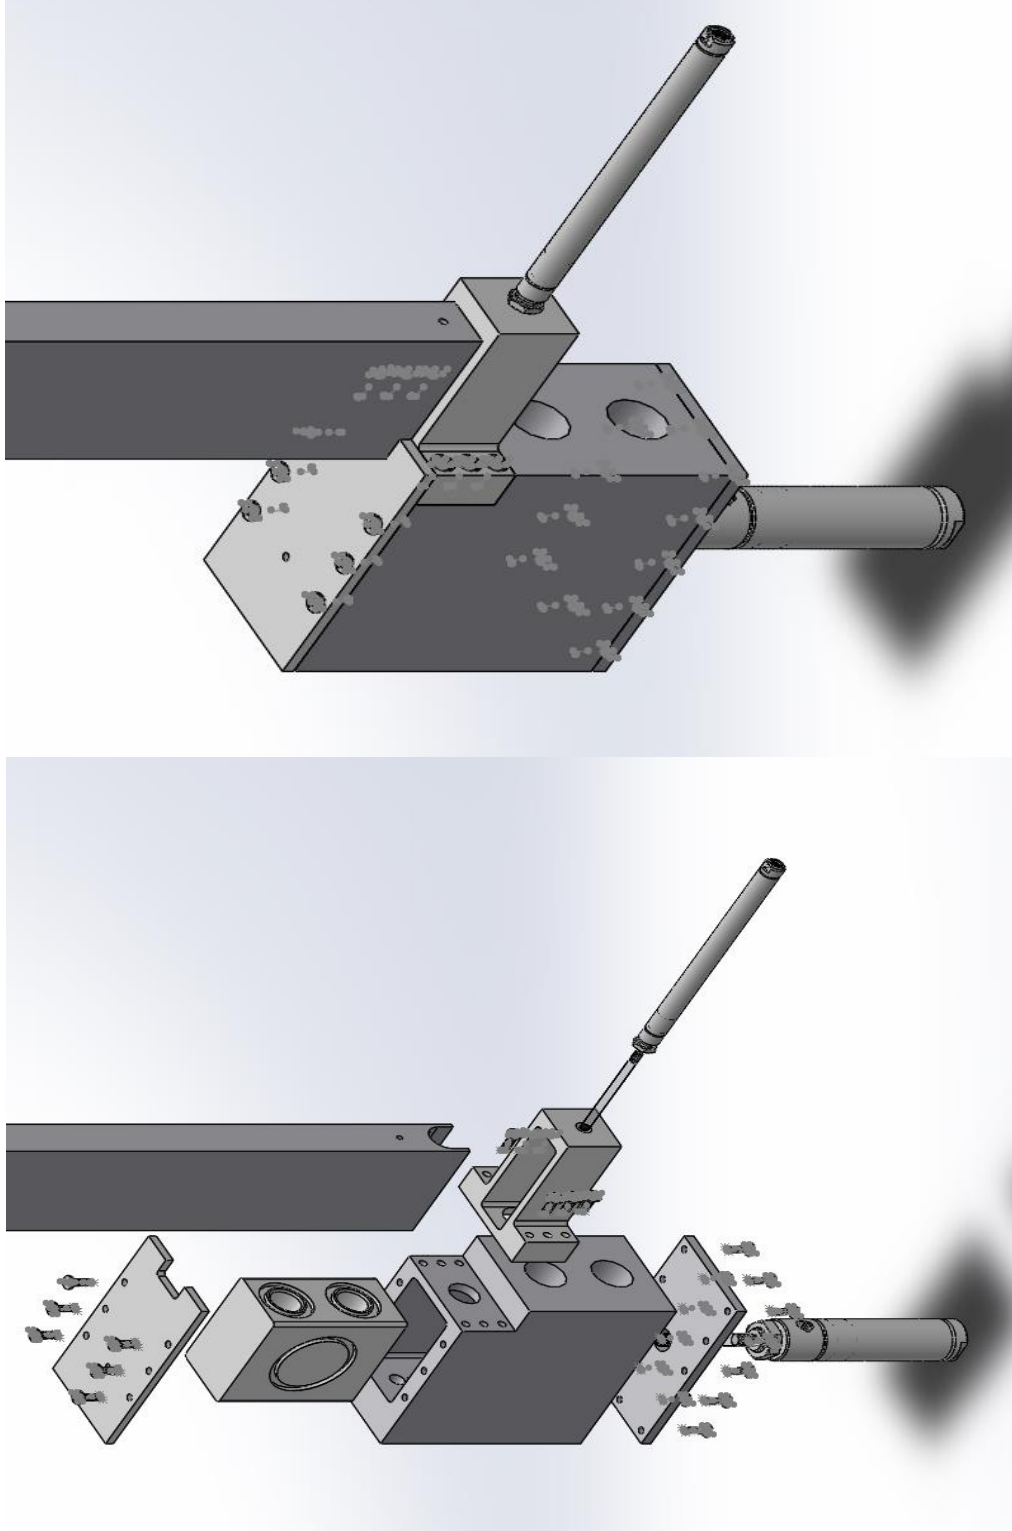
CAD Exploded and Assembled View of Sample Injection/Ejection Valve.
